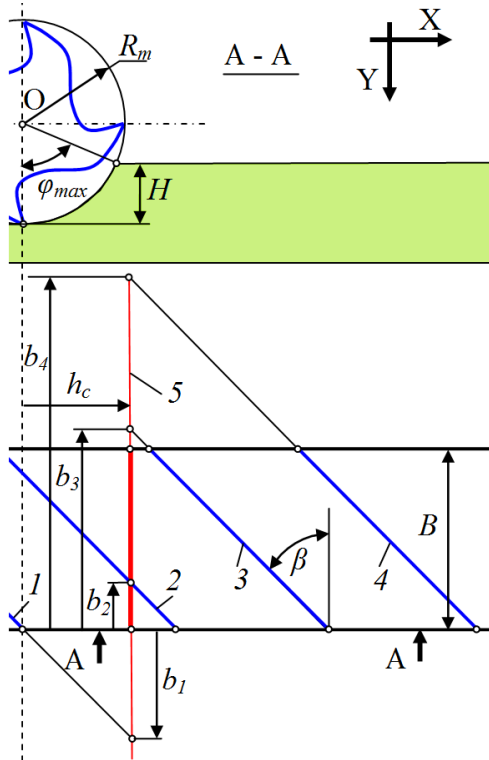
Scheme for determining the geometric engagement of the cutter and the workpiece (CWE)
